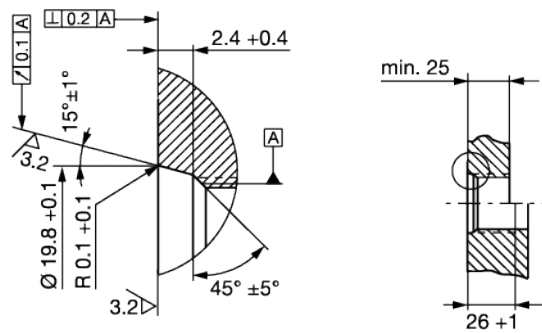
Mounting hole M18×1.5 according to ISO 6149 O-Ring 15.4×2.1
